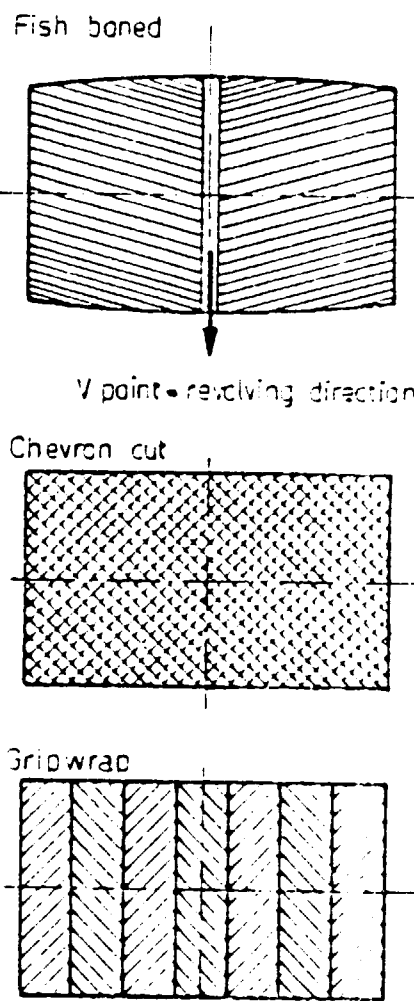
24 : A. Rubber lagged drive pulleys to improve belt grip
